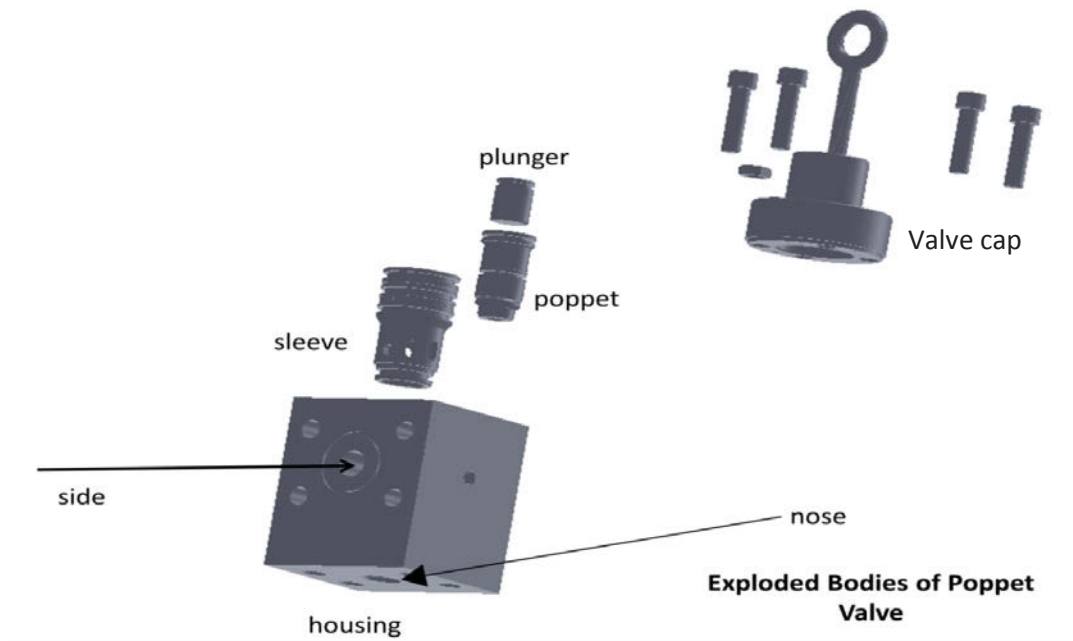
Exploded view of the valve. (Picture: Courtesy of BOC Hydraulics, Salem, Ohio)
